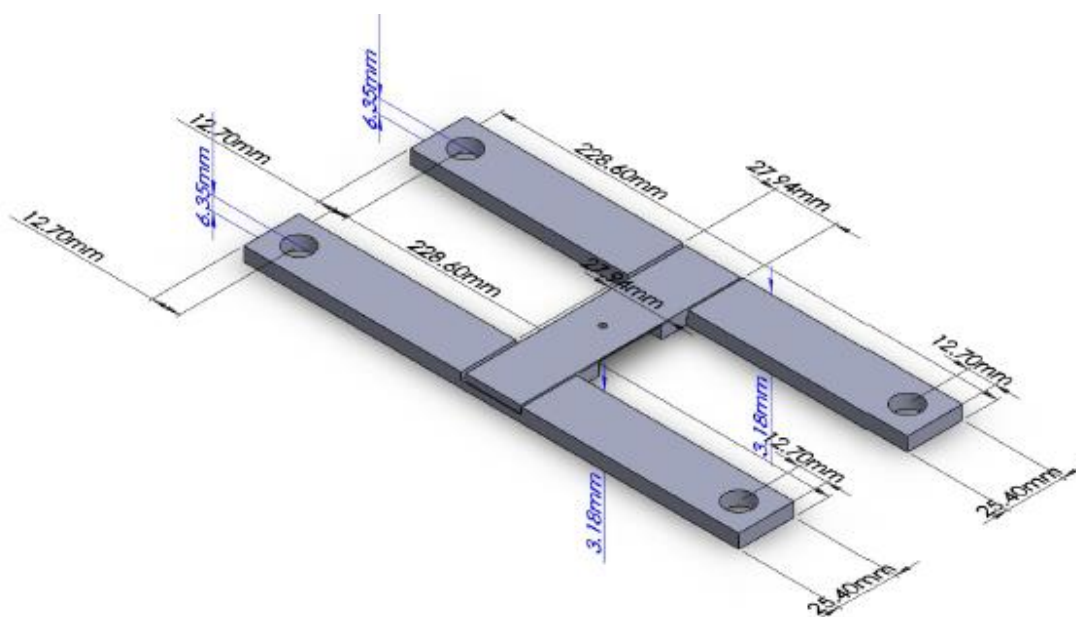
A three dimensional model of the microscope stage interface used to position the lens implanted in an anesthetized animal with the laser beam. Screws passed through the four corner holes to hold the interface in place on the microscope stage.
